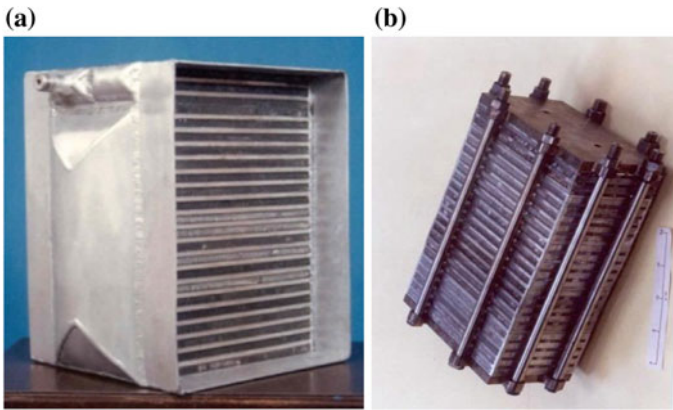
Vacuum-brazed a aluminium heat exchanger and b fixture used for brazing
